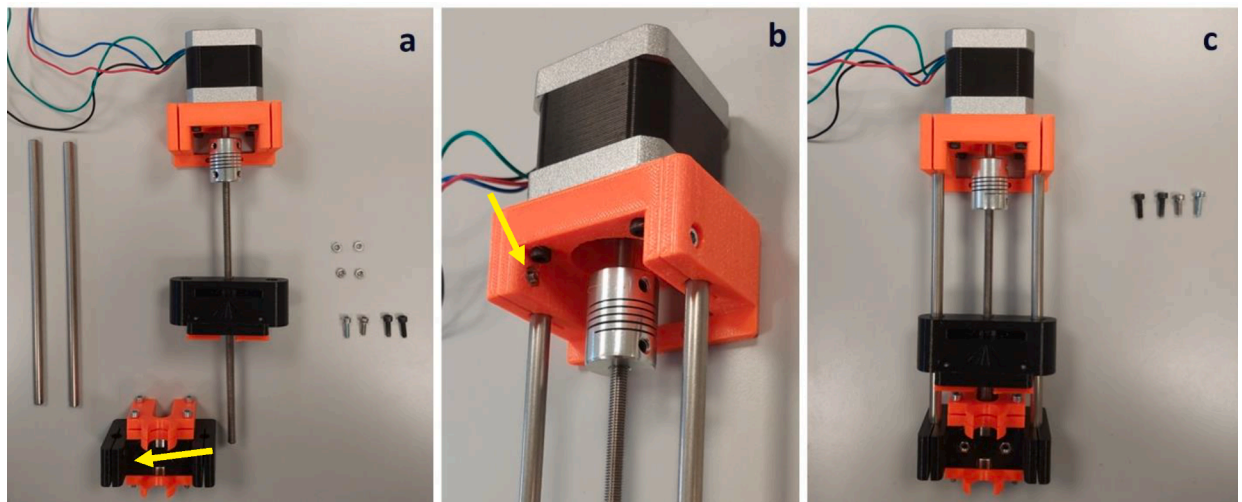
Mounting the syringe pumps using the side smooth rods: (a) Exploded view of the components. (b) The smooth rods are introduced to the end motor supports and tightened with screws. (c) Top view of the syringe pumps before assembly on the aluminum support.
